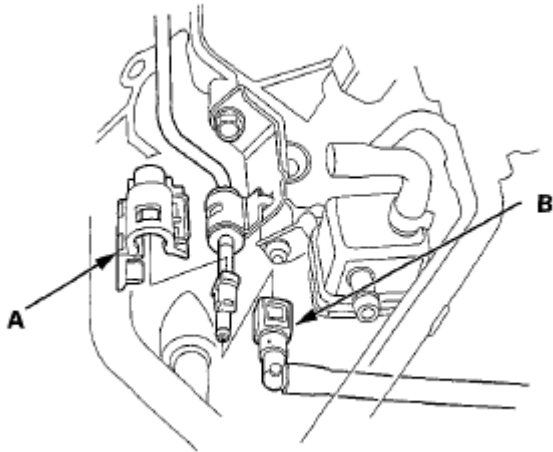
Identifying Quick-Connect Fitting Cover & Fuel Feed Hose
